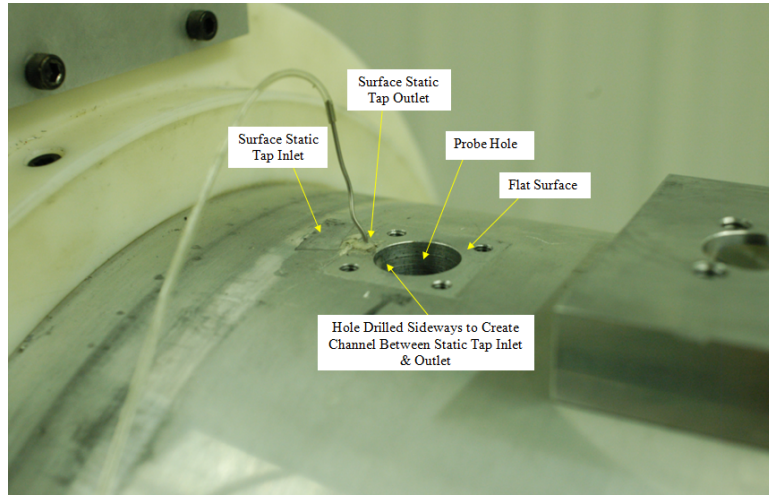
Probe Hole with Machined Flat Outer Surface
